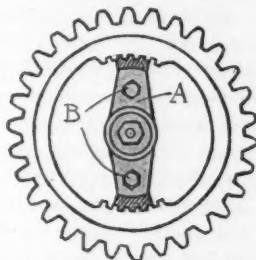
CROSSLEY MAGNETO ADJUSTMENT
